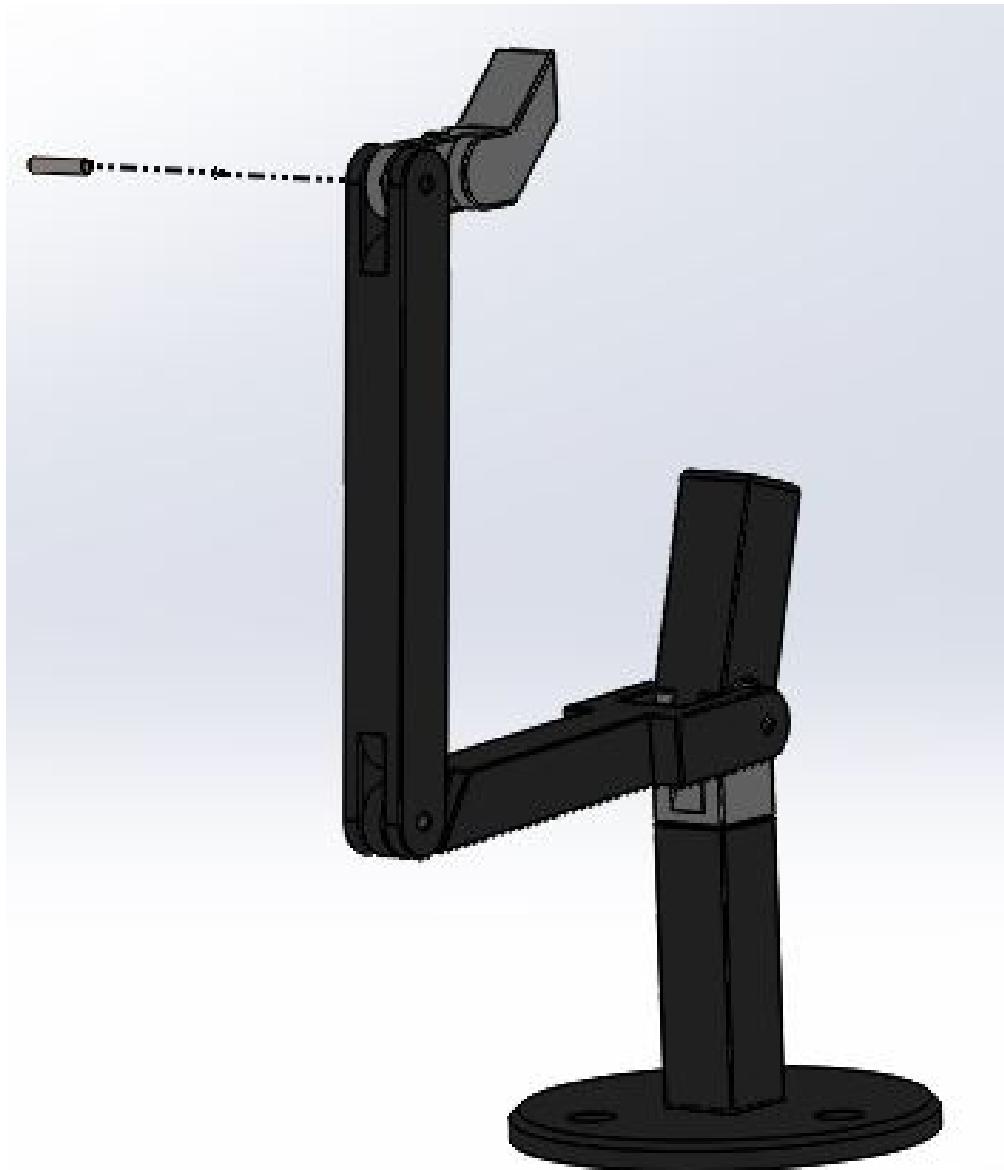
Rodriguez, Juan: Assembly Step 4
